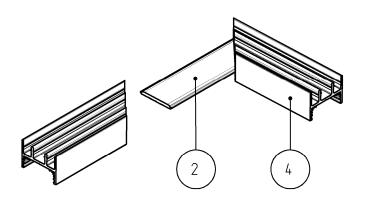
Exploded drawing of top and bottom guide profile with corner connectors for 90° guide profiles
